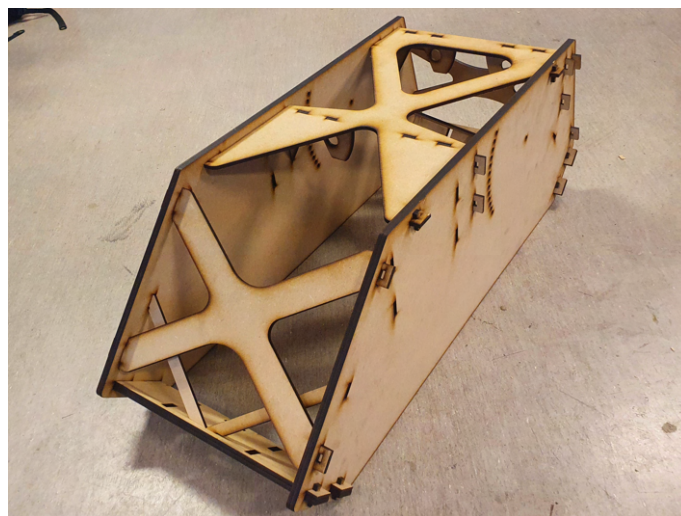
Test rig in laser cut MDF without motor, suspension, steering modules or seat mounted.
